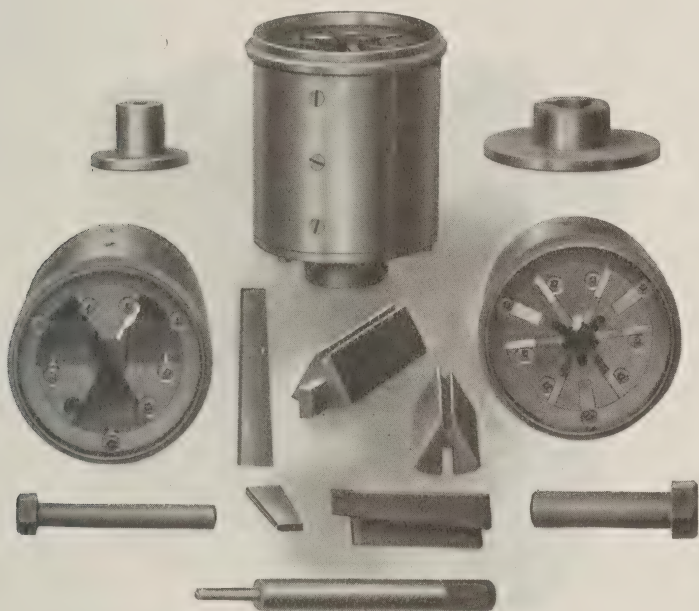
CUTTER HEAD AND ATTACHMENTS
